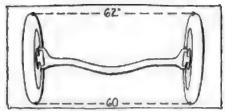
FRONT VIEW OF SPREAD WHEELS
